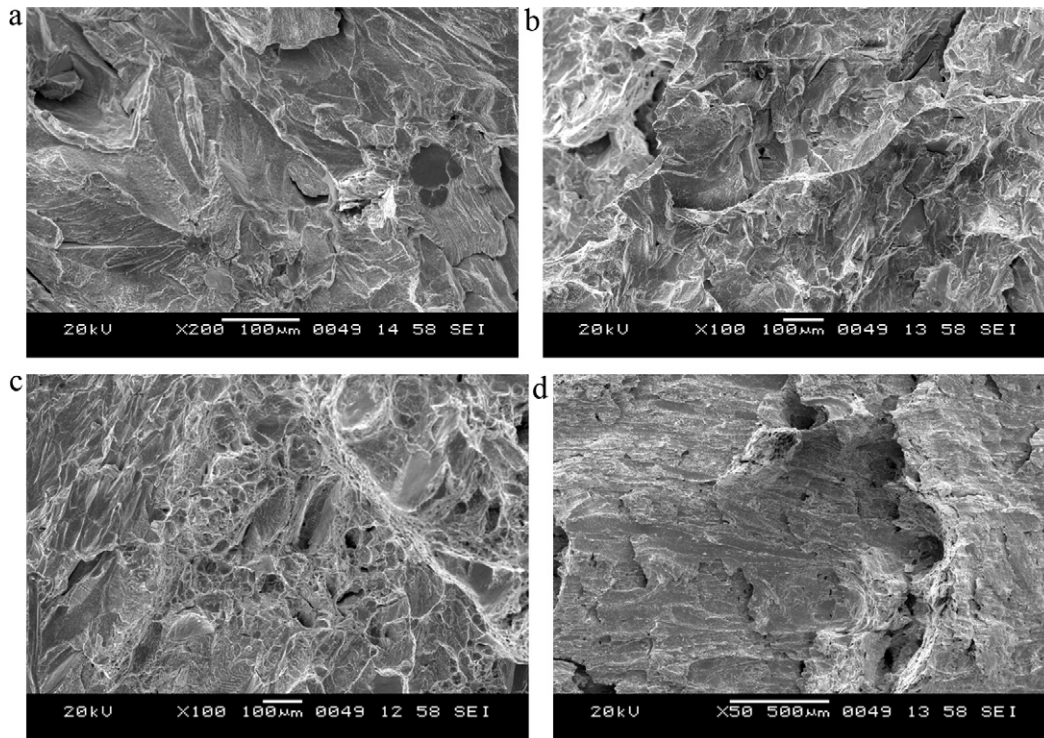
Fractured surfaces of solder specimen tested in impact at (a)  $-90^{\circ}\text{C}$  (b)  $-50^{\circ}\text{C}$  (c)  $-20^{\circ}\text{C}$  and (d)  $30^{\circ}\text{C}$  for solder solidified in stainless steel mould samples.
